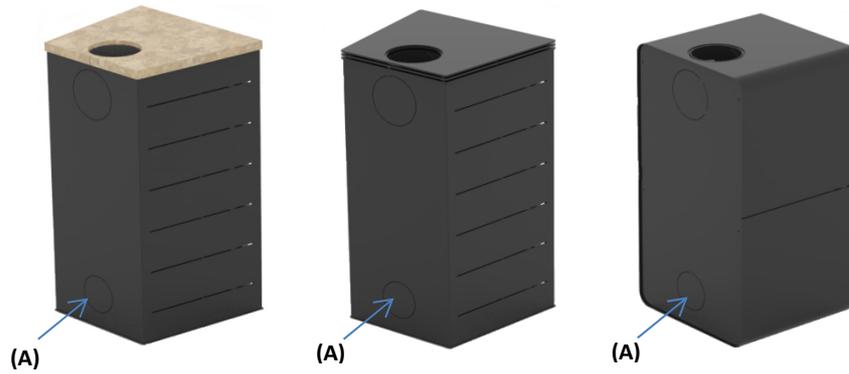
Rear view of each model; (A) Section to remove for external air inlet
